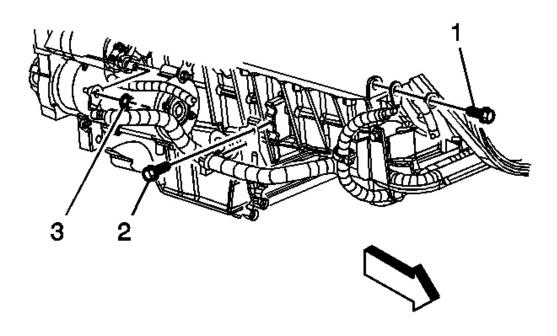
Positive Battery Cable Clip Bolt Courtesy of GENERAL MOTORS CORP.
